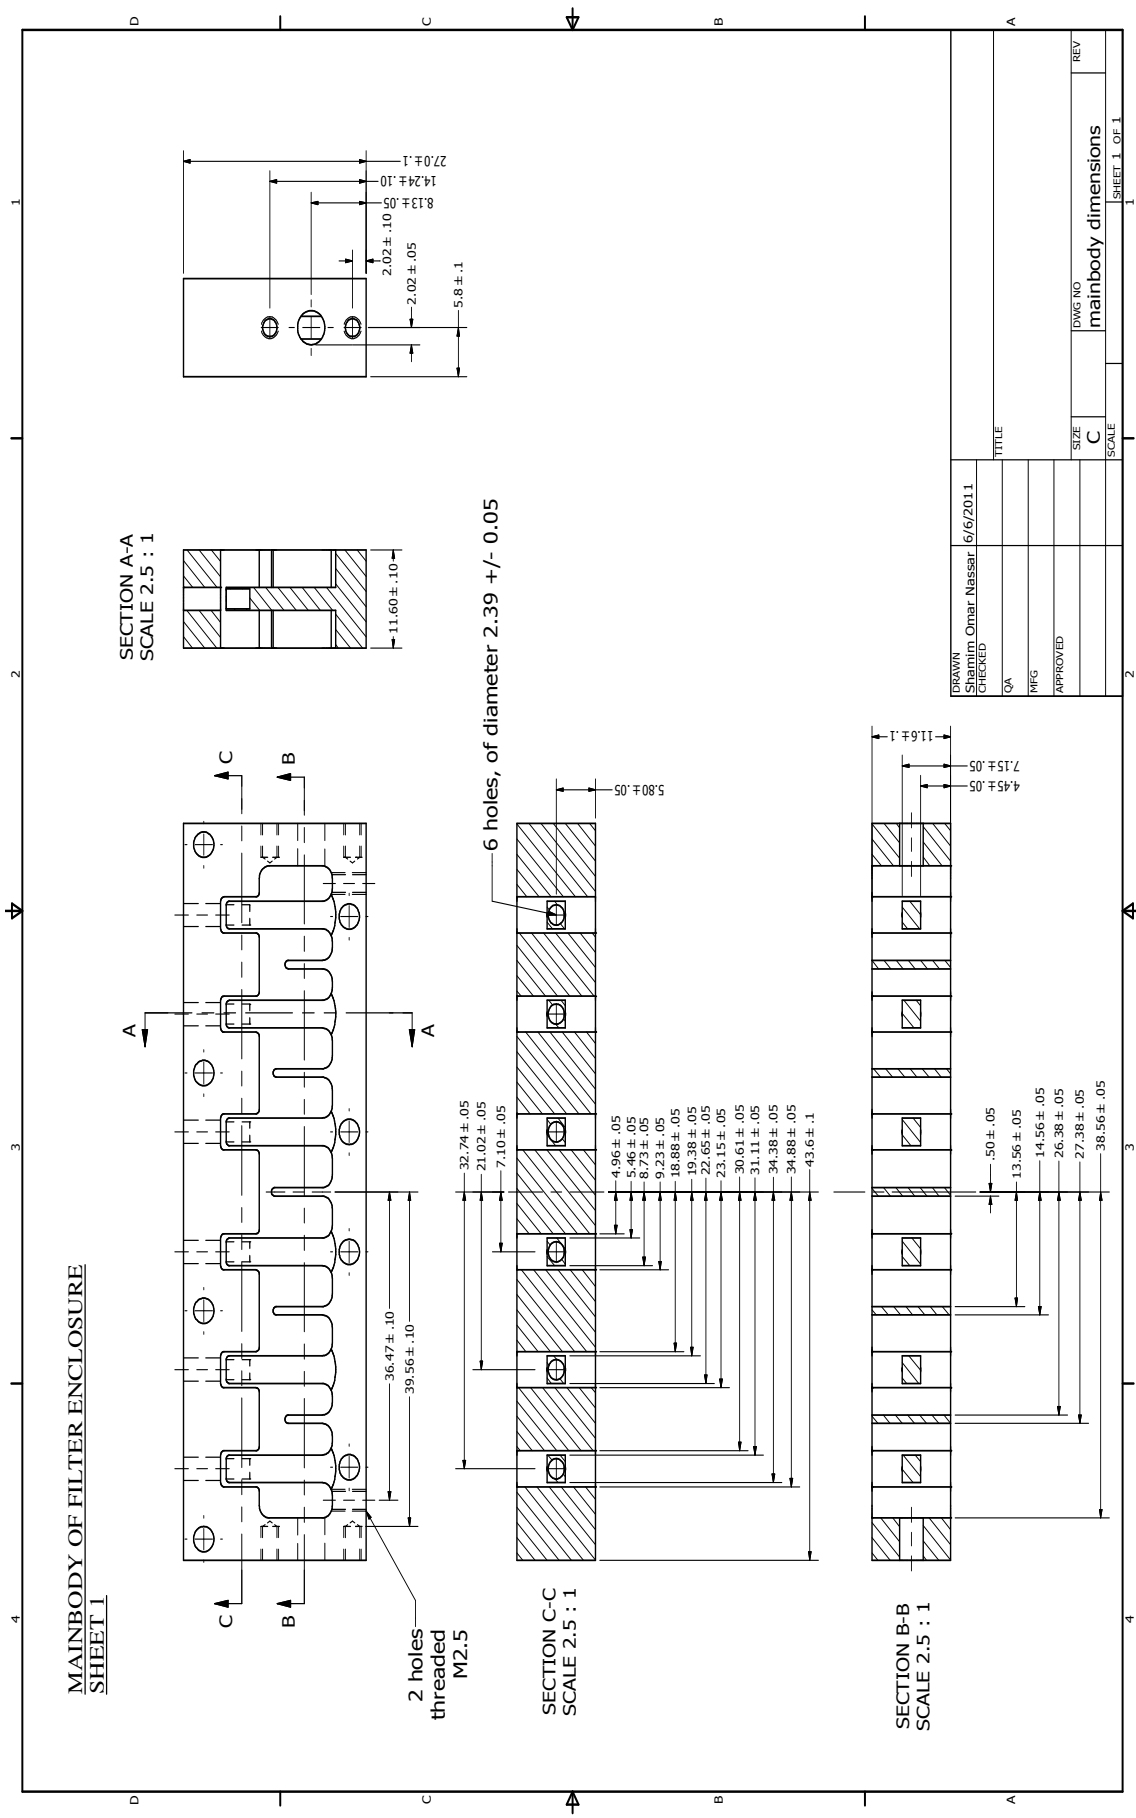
2.125GHz Combine Filter Main Body Dimensions - Sheet 1
